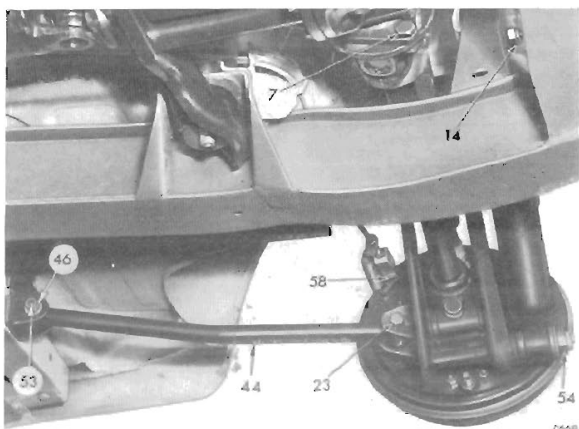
Radius rod attachments (Herald 1200, 12/50 and Vitesse)
